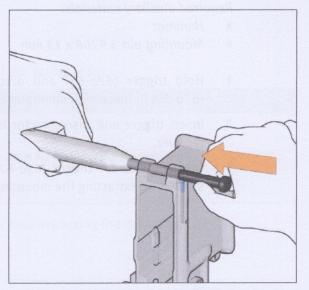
Pushing locking pin in front of the stop pin for locking pin
